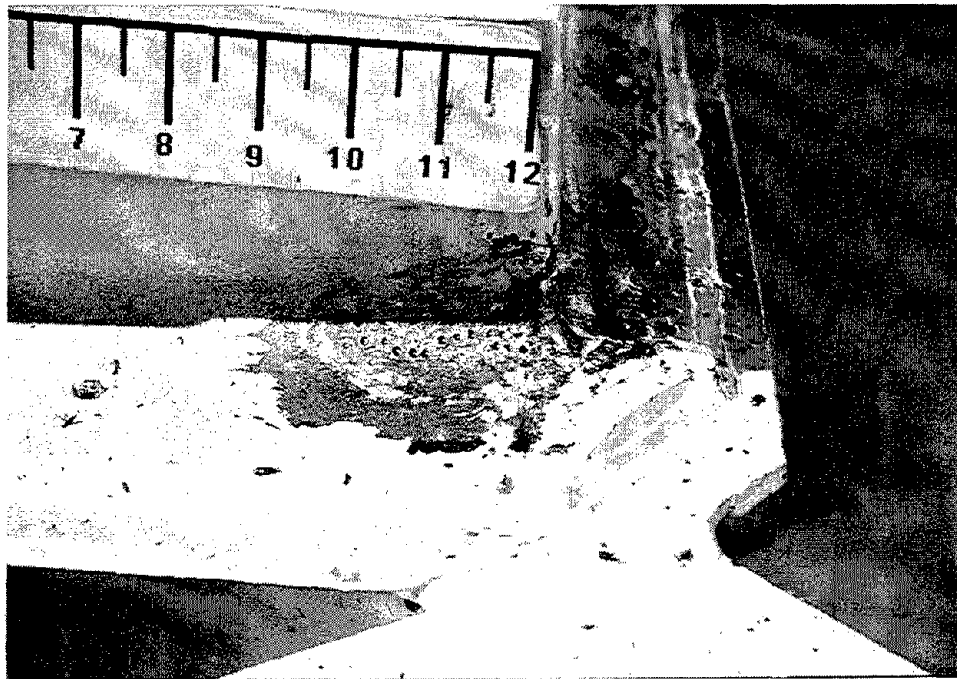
Earthquake induced stress caused a weld to crack and leak oil.
